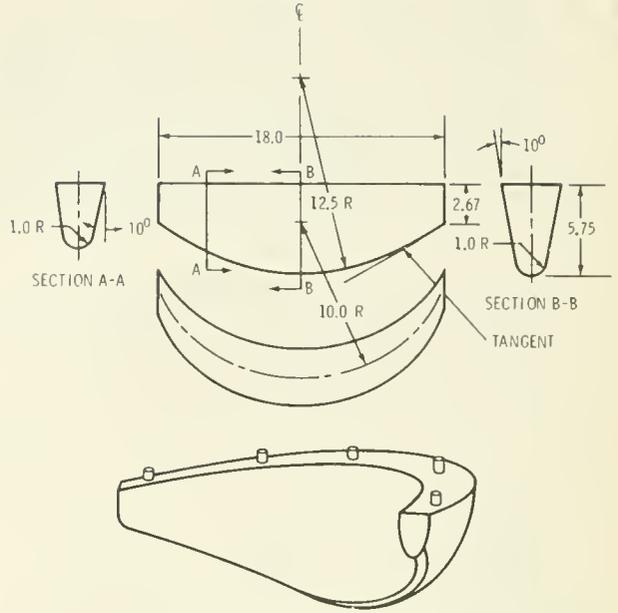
Bead Unseating Fixture Dimensions in Inches
